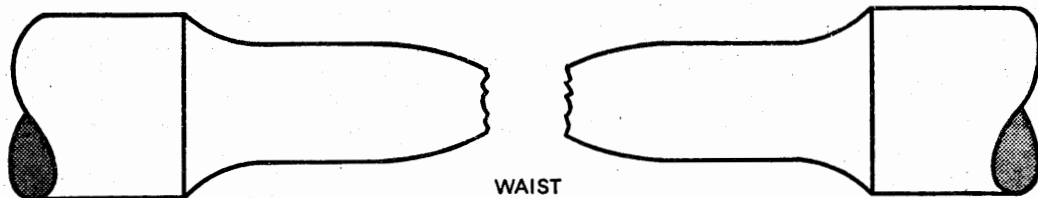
FRACTURED TEST PIECE SHOWING WAISTING
